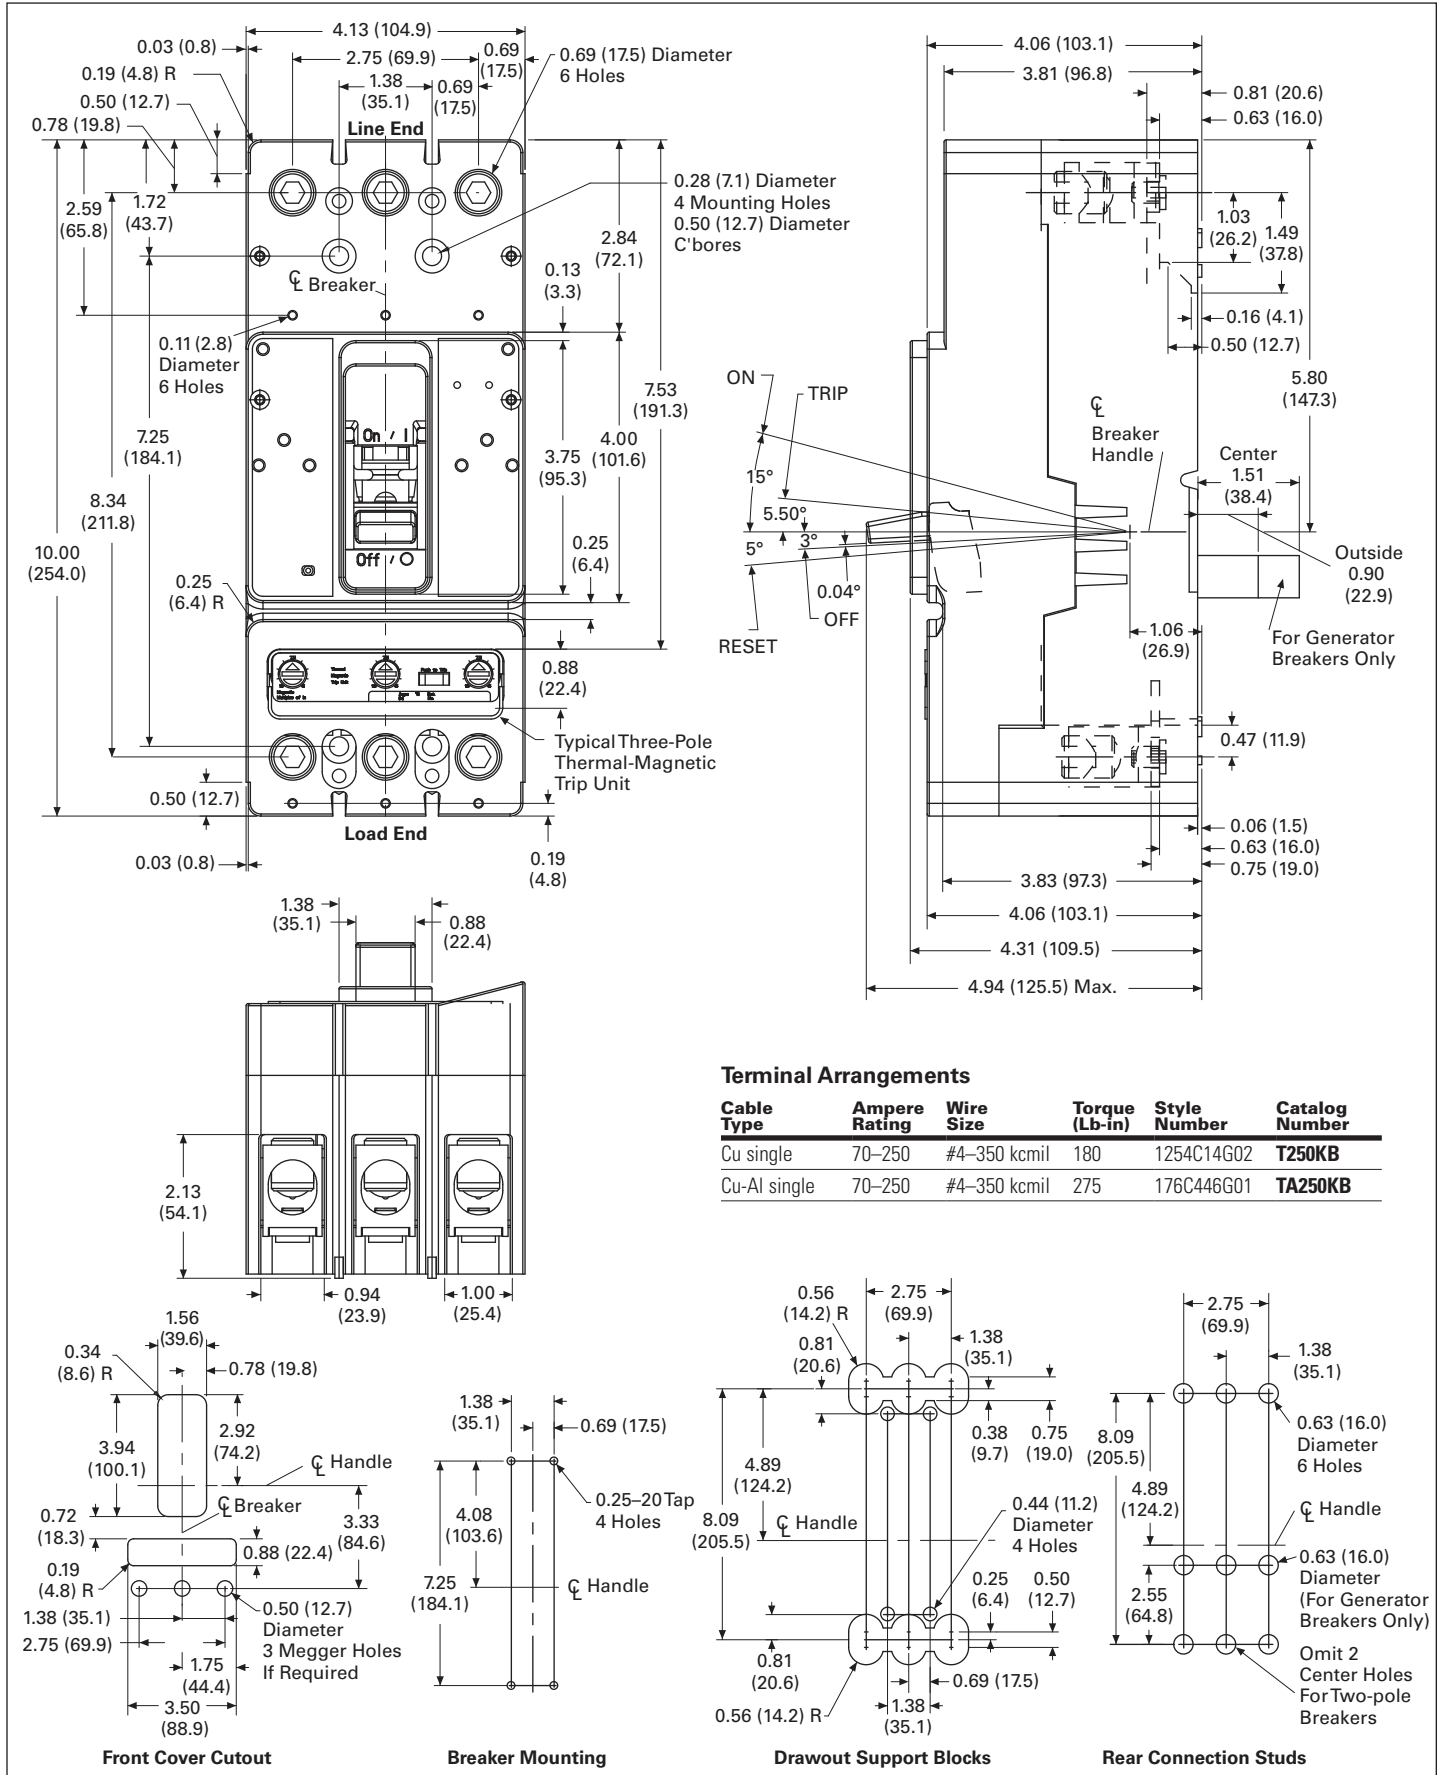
Type JG 175-250A Three-Pole—Dimensions in Inches (mm)
